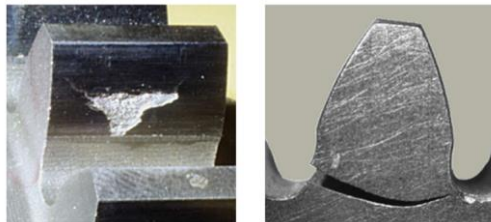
Typical damage examples. (left) Macropitting. (right) Tooth root breakage—tooth failure [161]
